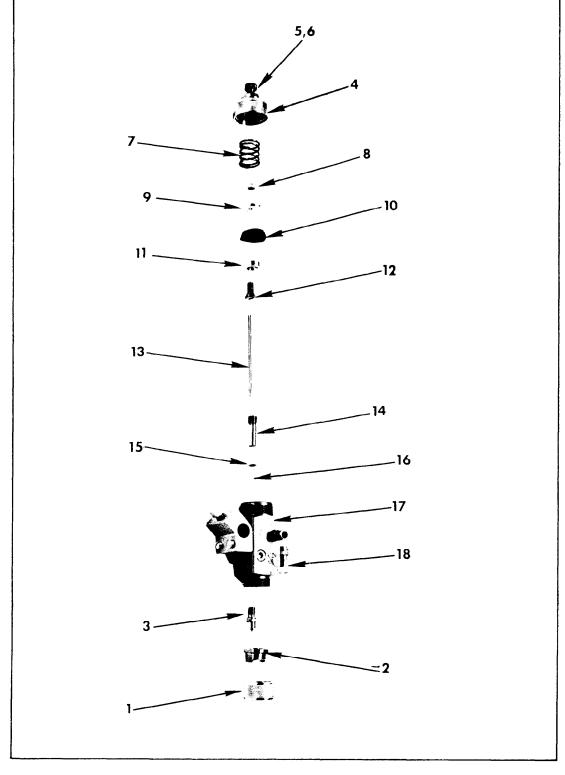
AD-29 (P/N 270 571) - Exploded View
